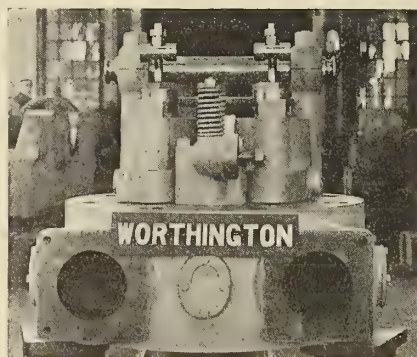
Back View of Cylinder Head and Valve Assembly
